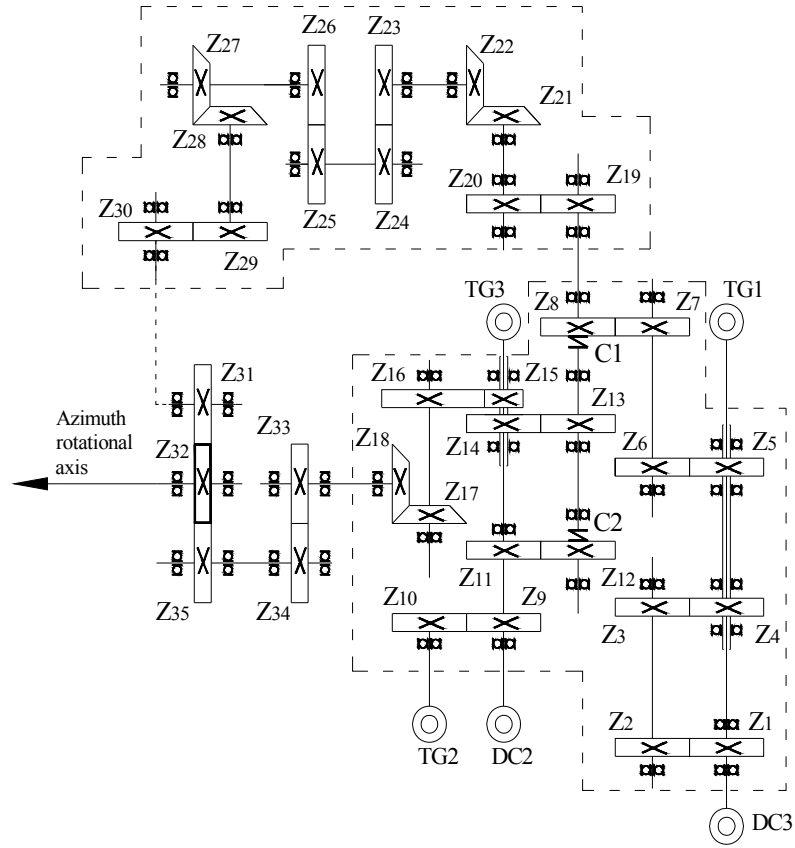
The gear backlash compensation mechanisms with the antenna drive motors for fast and slow azimuthal rotation. DC2, DC3 – fast and slow rotation motors; Z32 – gearwheel; Z1–Z18, Z33–Z35 – differential gears; C1, C2 – electromagnetic clutches; Z19–Z31 – backlash compensation gears.
